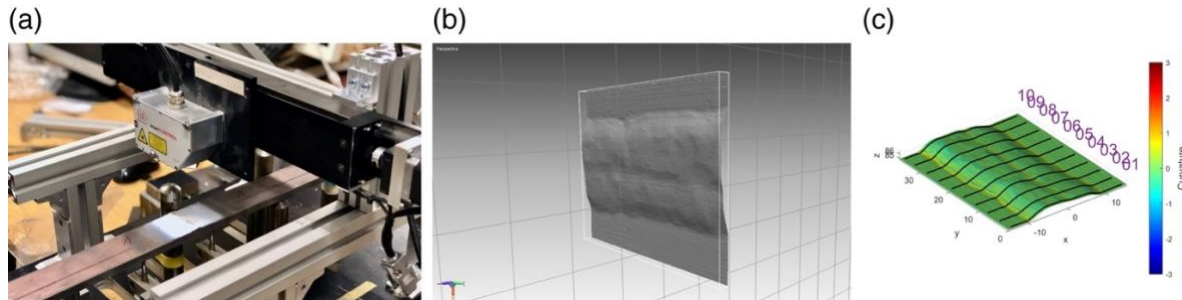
(a) Laser scanning of a butt joint; (b) visualization to check scan quality; (c) assessment of geometry with 2D weld slices⁷.
